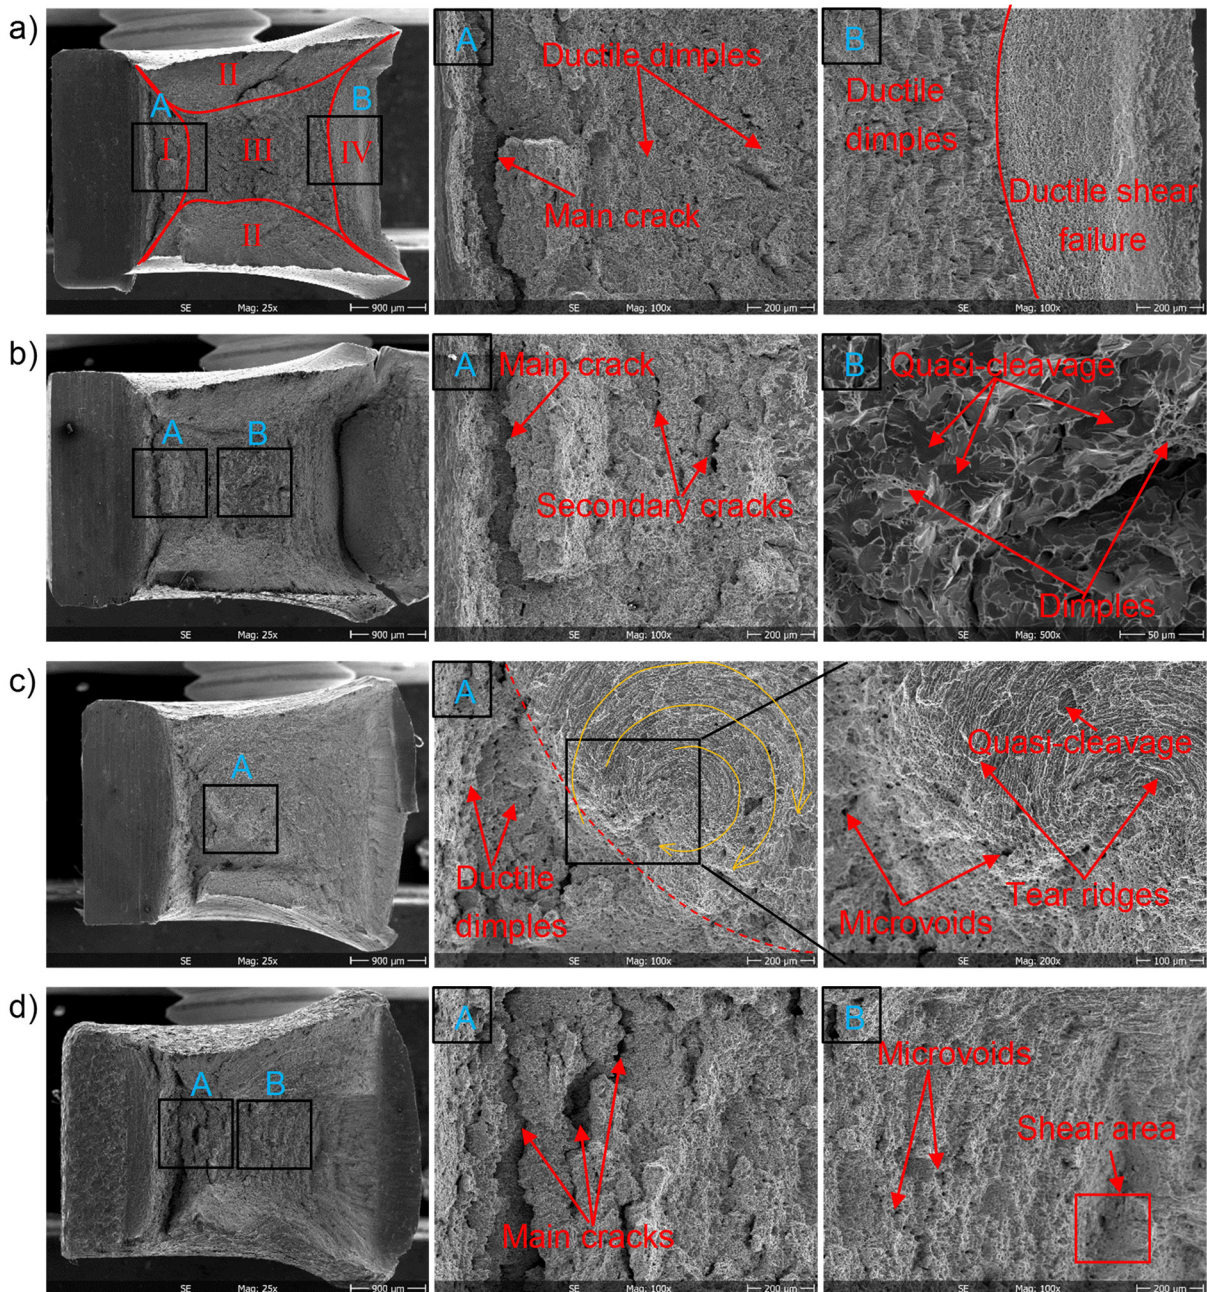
Fracture appearances after impact testing for a) AISI 316L, b) AISI 1012, c) AW and d) AW SP. Regions A and B are magnified right to the fracture pattern.
